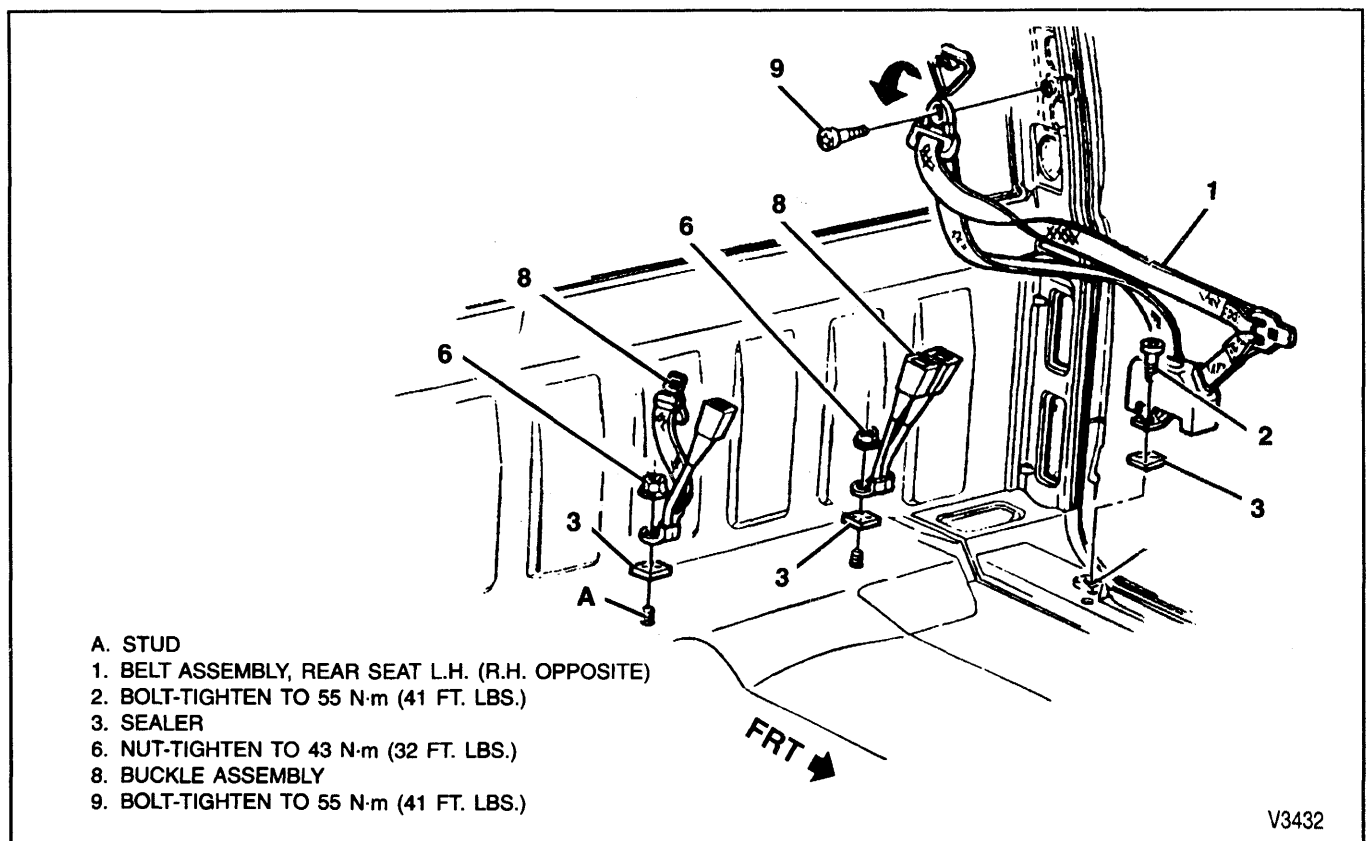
Rear Seat Belts (Crew Cab with Folding Rear Seat)
